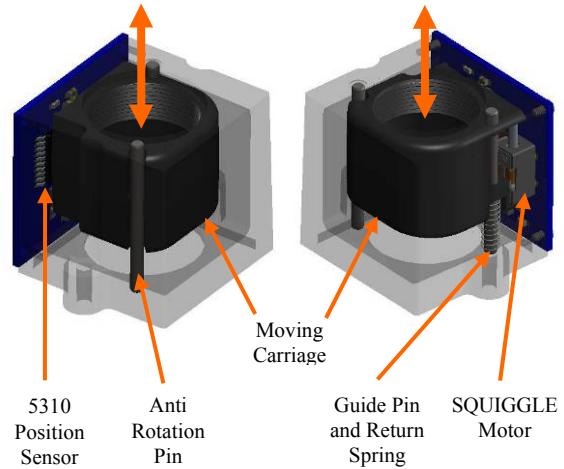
M3-F Mechanical Integration inside the Module Housing
